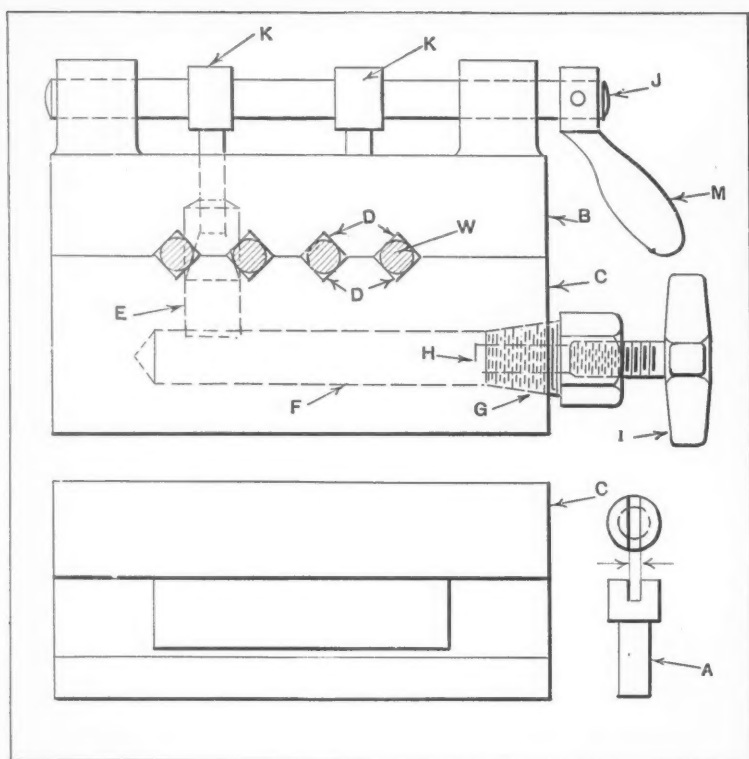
Tool Used in Turning Bevel on Edge of Cup-shaped Packing
